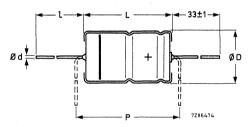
Style 1; see Table 1a for dimensions d, D, L, I and P.
